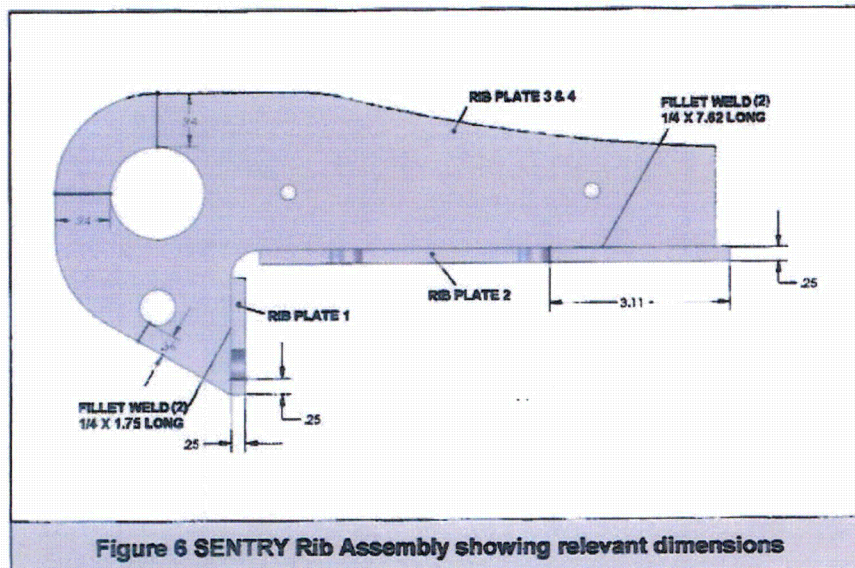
SENTRY Rib Assembly showing relevant dimensions
